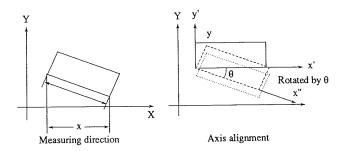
Aligning a workpiece reference axis with a measuring direction (axis)
